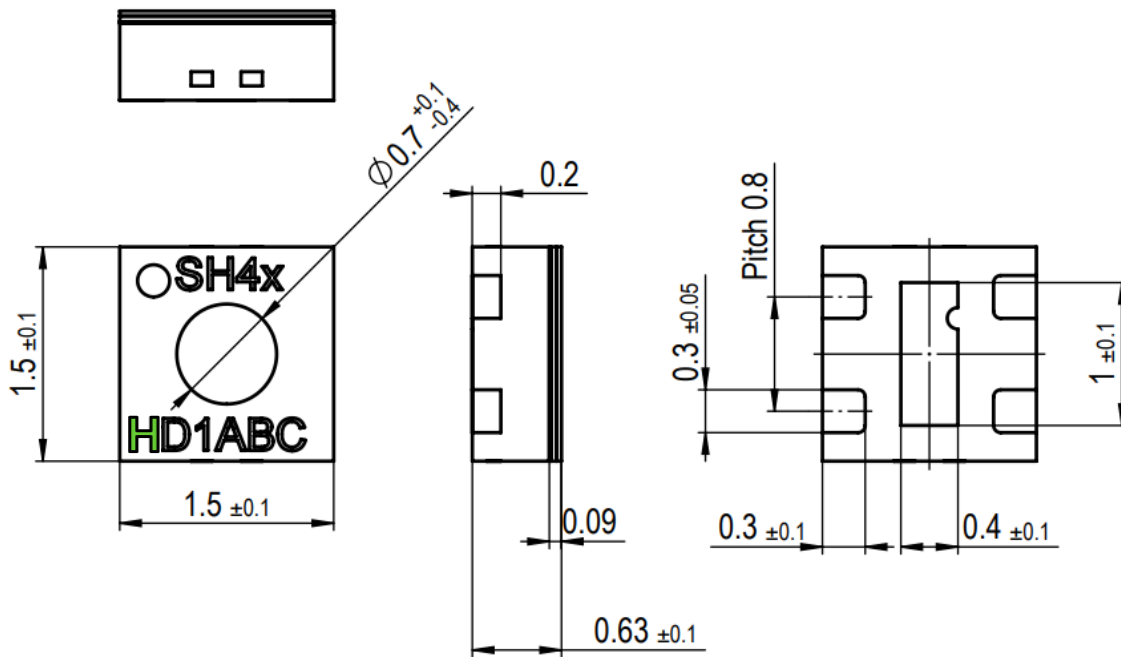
Dimensional drawing of SHT4xI-Analog with filter membrane, including package tolerances (units mm).
